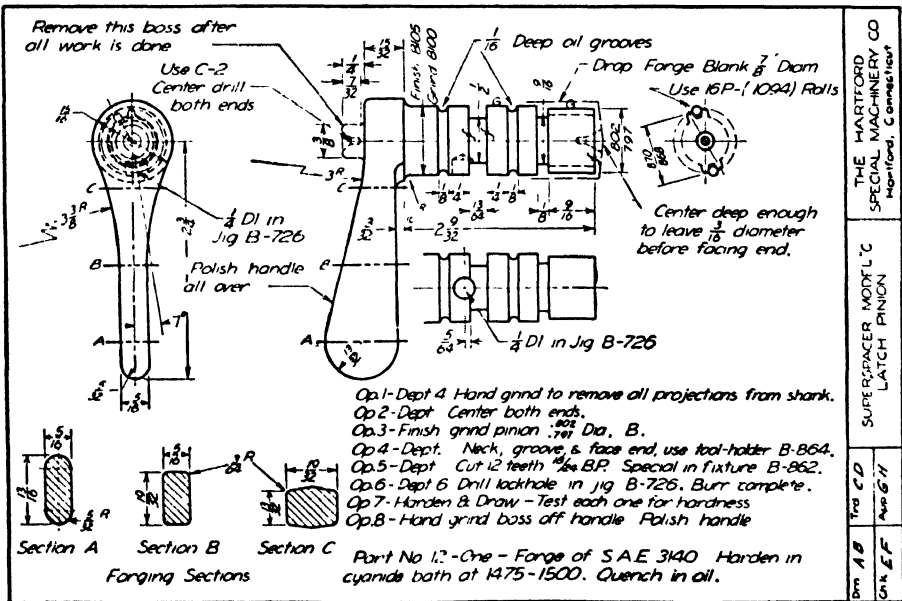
Working drawing for part shown in Fig. 11-3.
